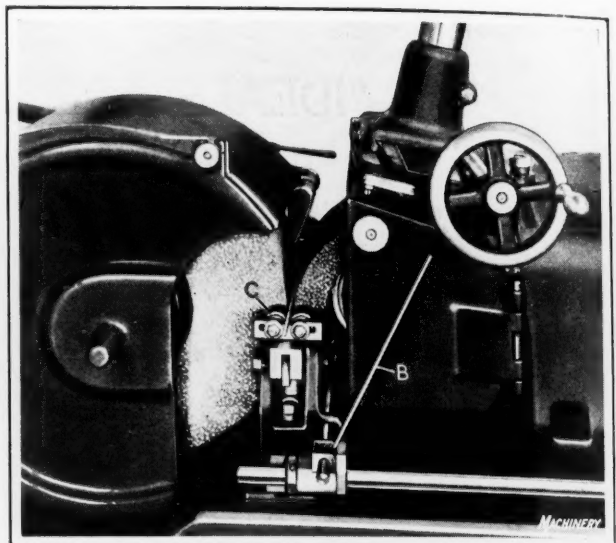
Grinding the Long Taper, Straight Portion and Short Taper of Spinning Spindle Blades
